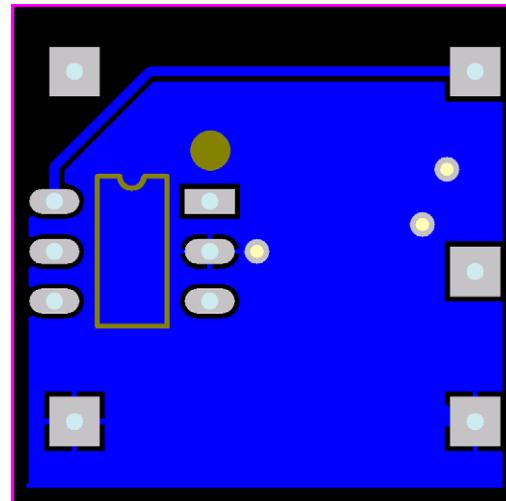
Bottom, TDFN4 1.2 mm x 1.6 mm PCB Layout
